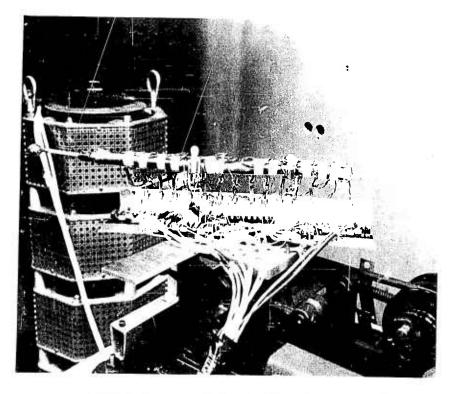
PRESSURE TRANSDUCER TEST FIXTURE.
